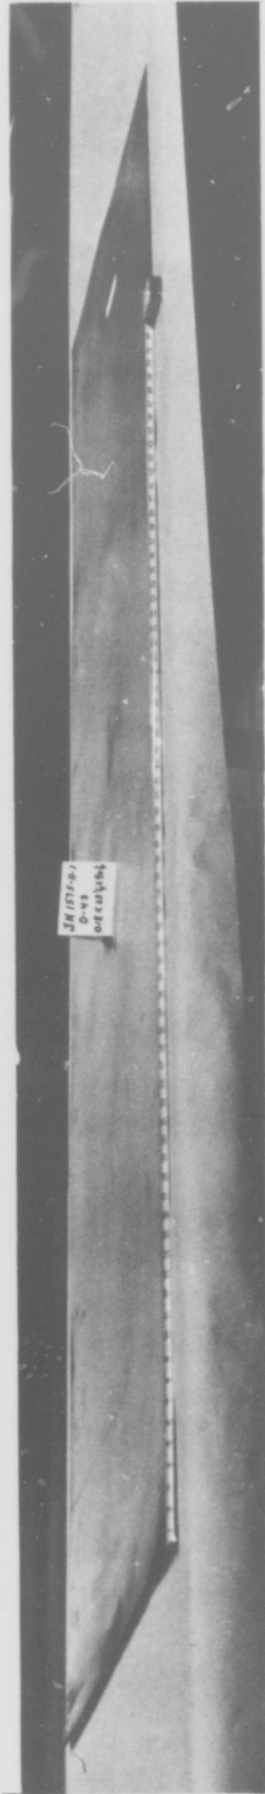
A. D-43 Sheet 0.018" Gage Before Shearing
